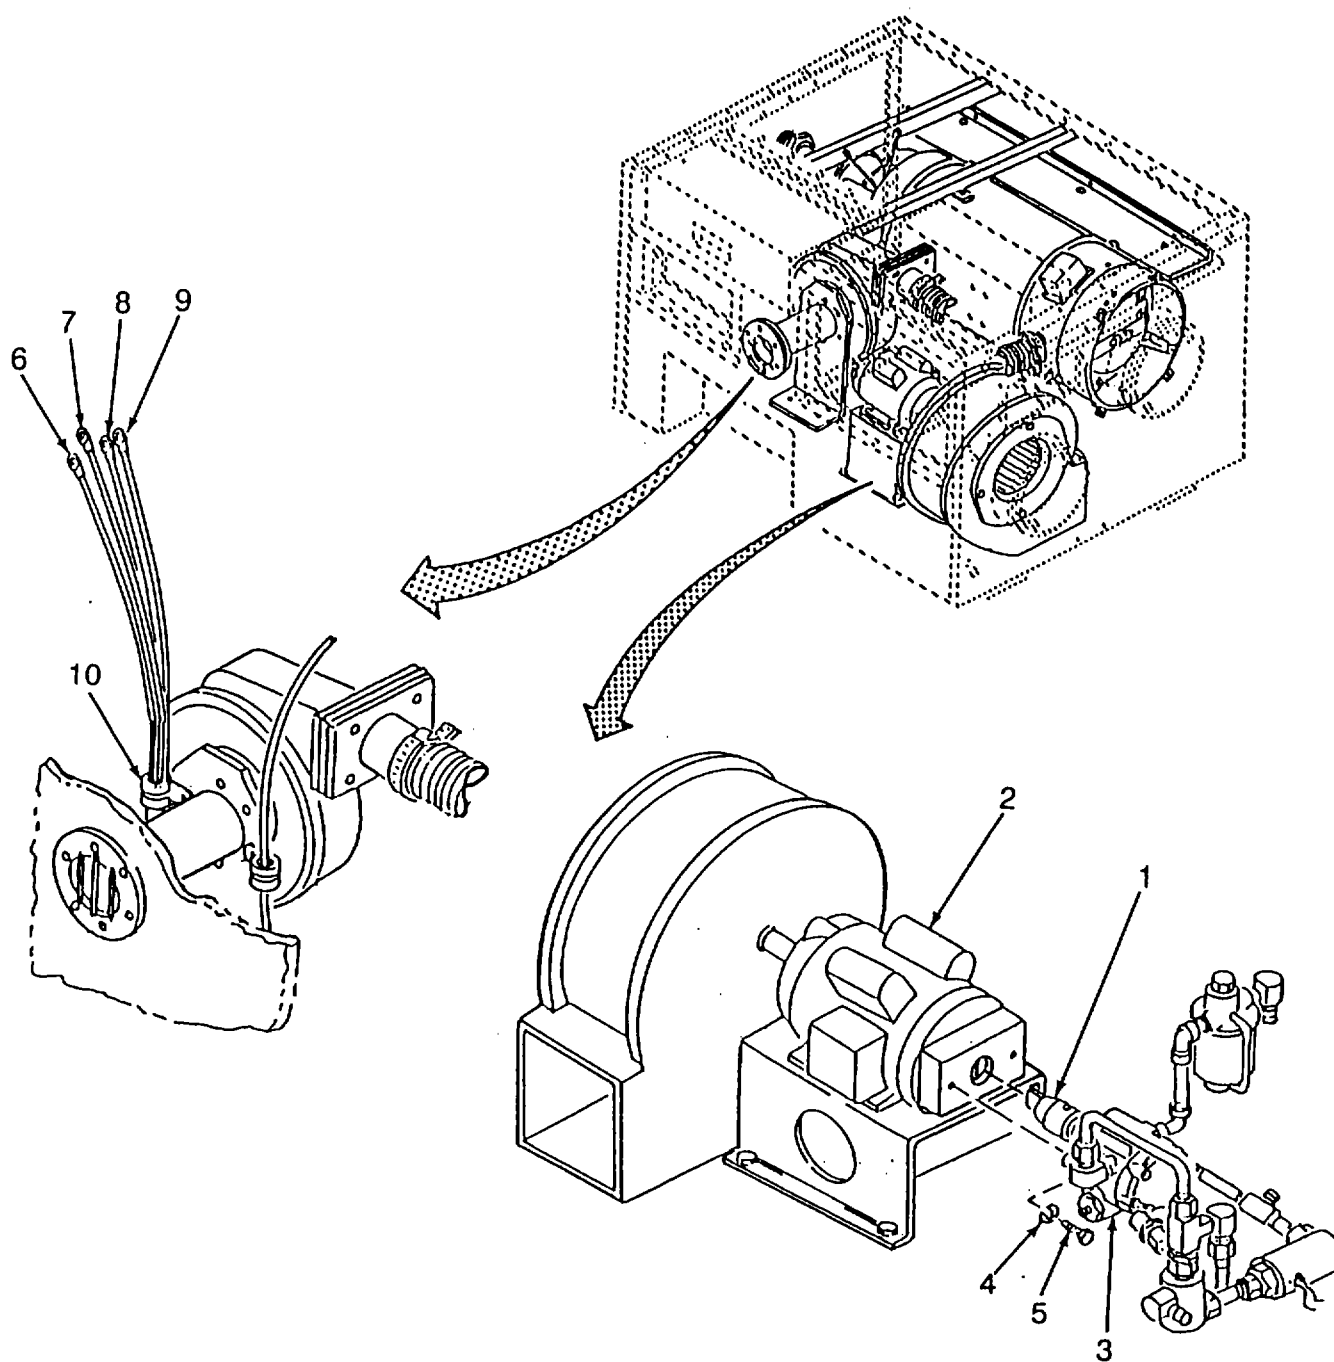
Fuel Pump and Solenoid Valve Assembly/disassembly (Sheet 2 of 2)
